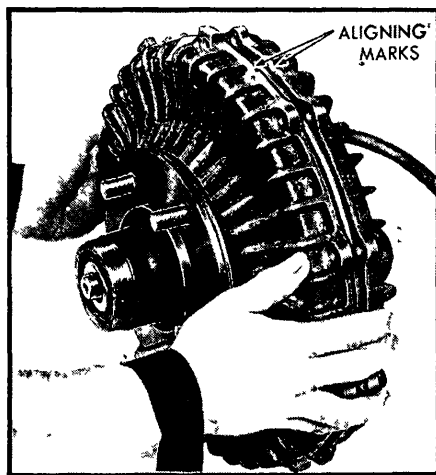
Installing hub and outer brake housing using Chrysler front disc brake
